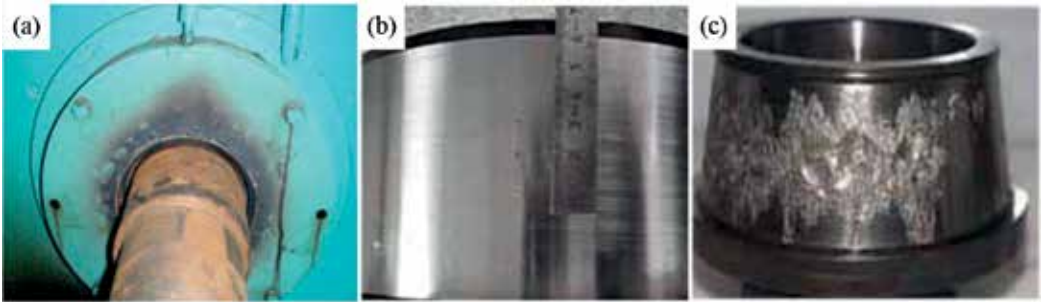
Bearings failure: (a) bearing in gearbox; (b) and (c) failure appearance of bearing.
